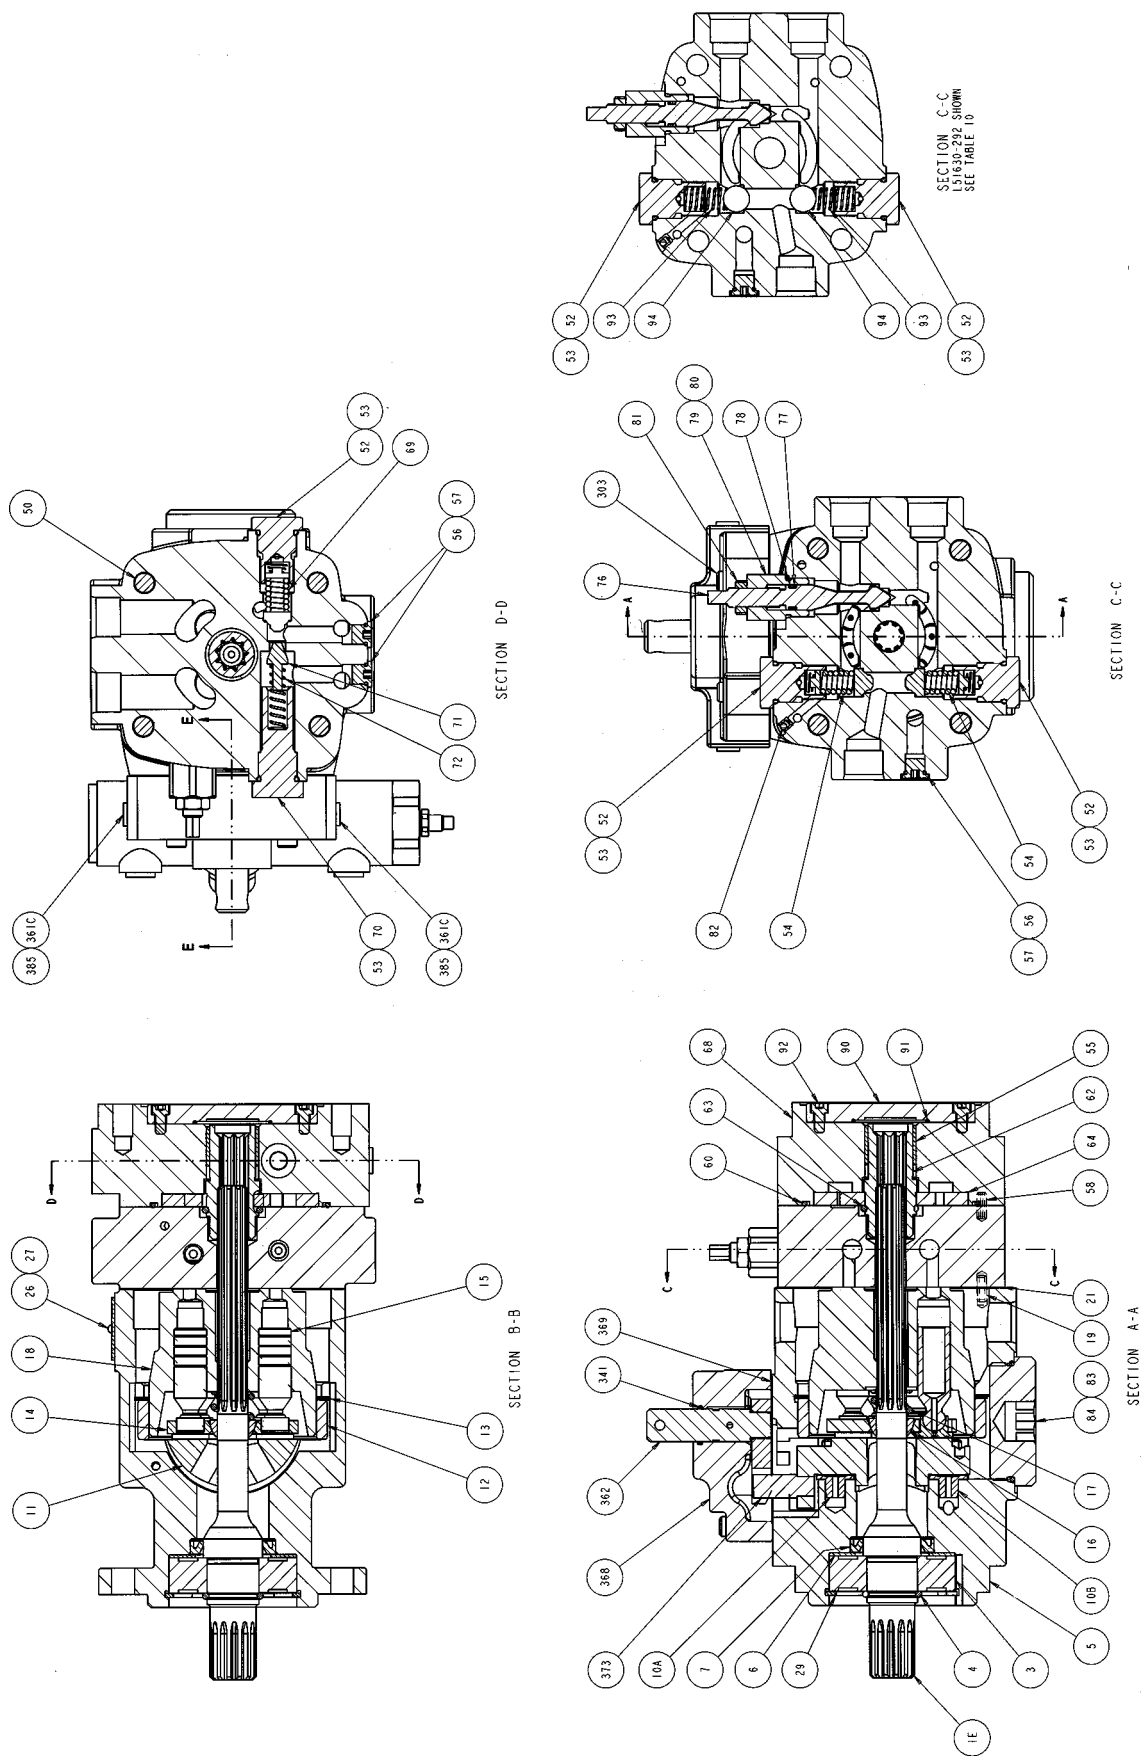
Cross Section Drawing (E51837-301 sh. 6).
